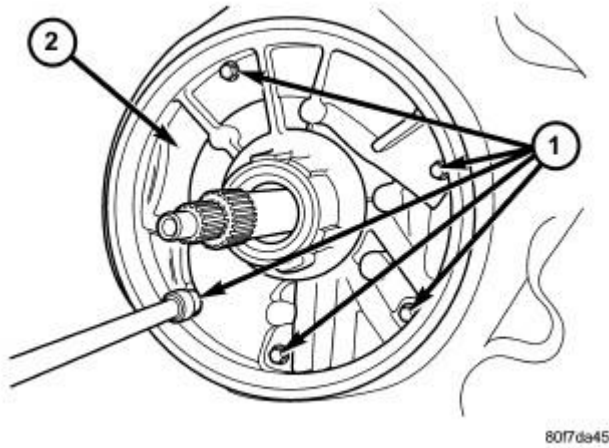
Remove/Install Oil Pump Attaching Bolts
